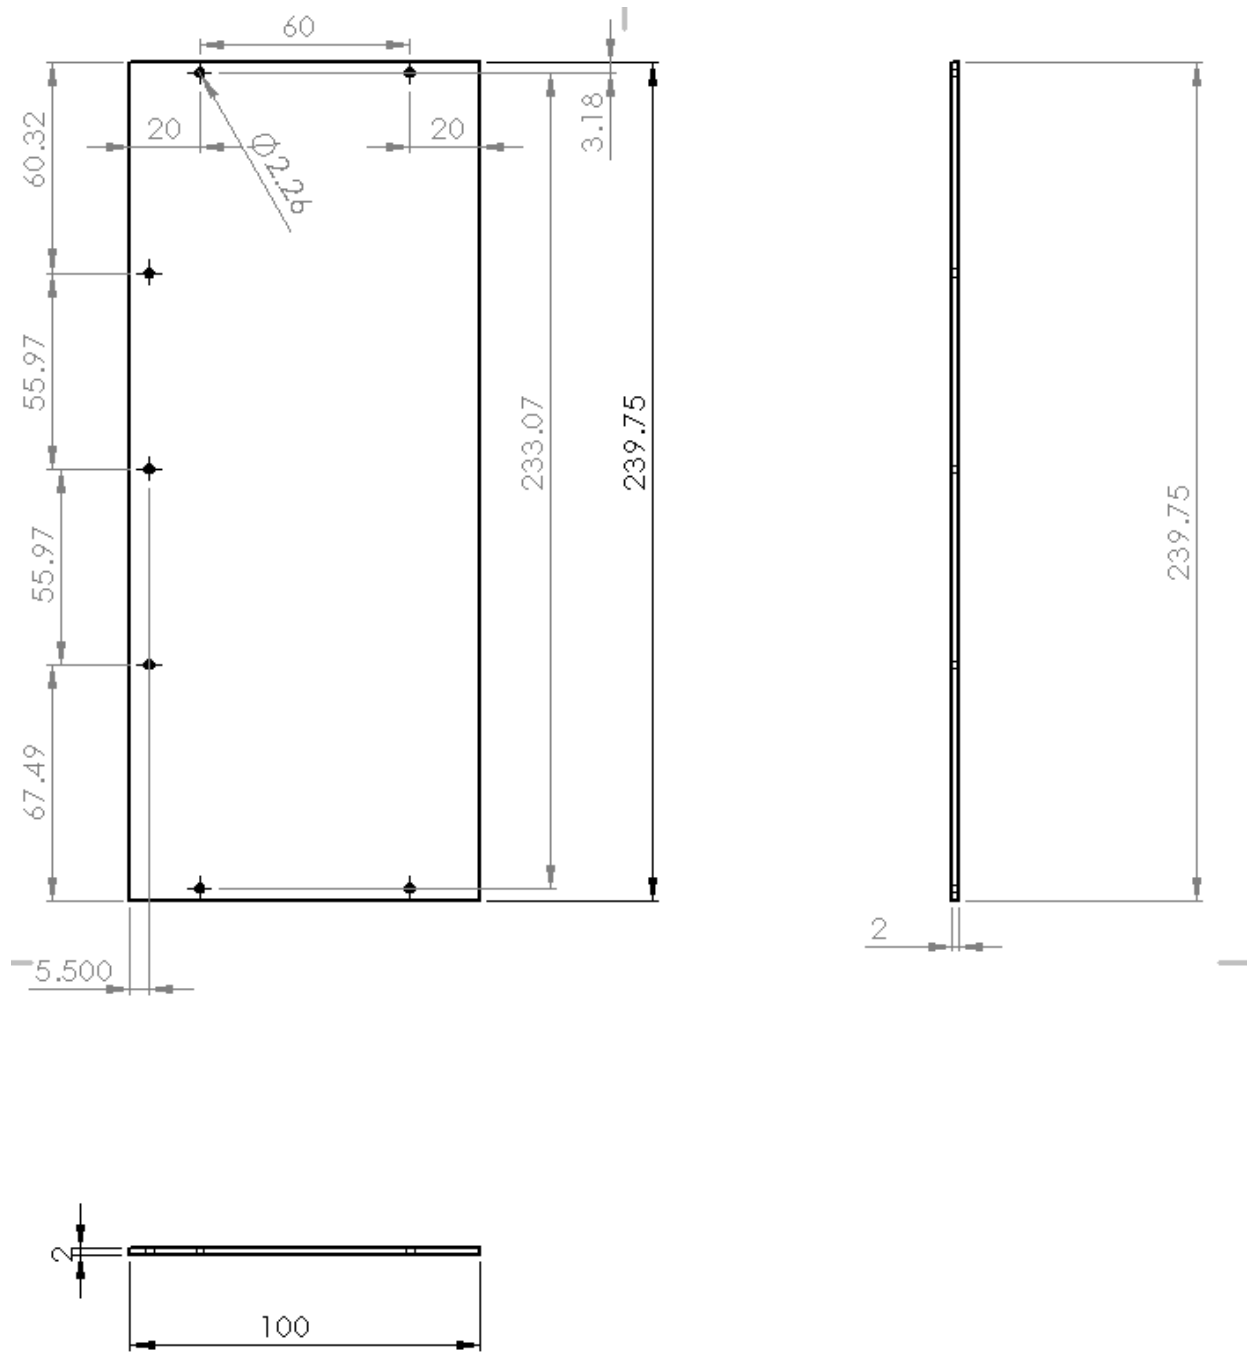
Mechanical drawing of the left and right load bearing structural walls with dimensions in millimeters. The walls will have an outer cross section of 10x10 cm in order to simulate CubeSat constraints.
